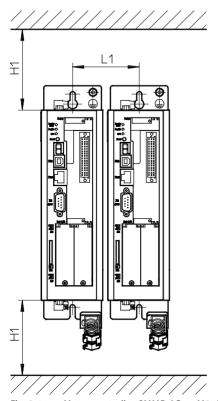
Motor controller CMMP-AS-...-M3: Mounting distance and installation clearance
